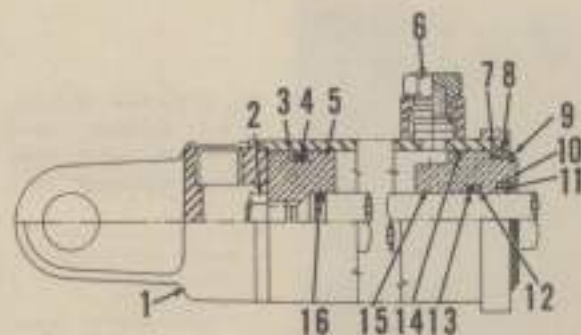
Cut-away view of the 2 1/2 inch remote ram which is available.
